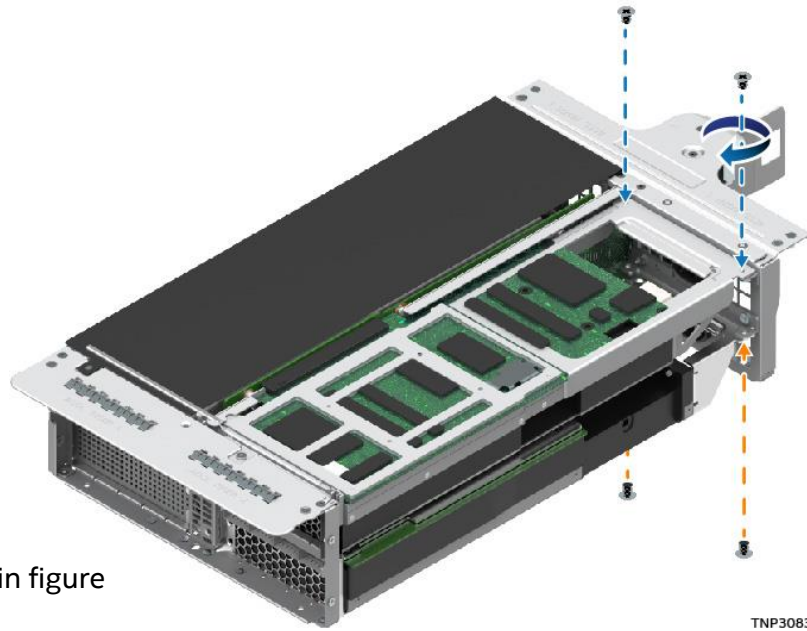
Securing the Accelerator Add-in Card in the Riser Assembly
